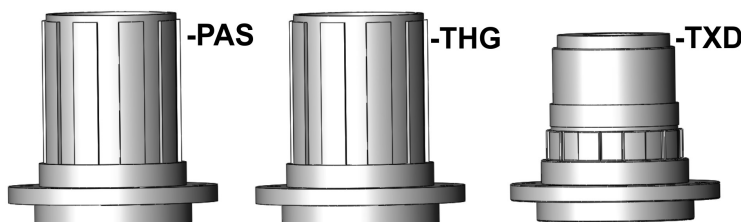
PAS only sensor and default Torque sensor both use industry standard Shimano HG cassette freehub drivers. For high end drivetrains, a torque sensing model with the SRAM XD driver is also available.
